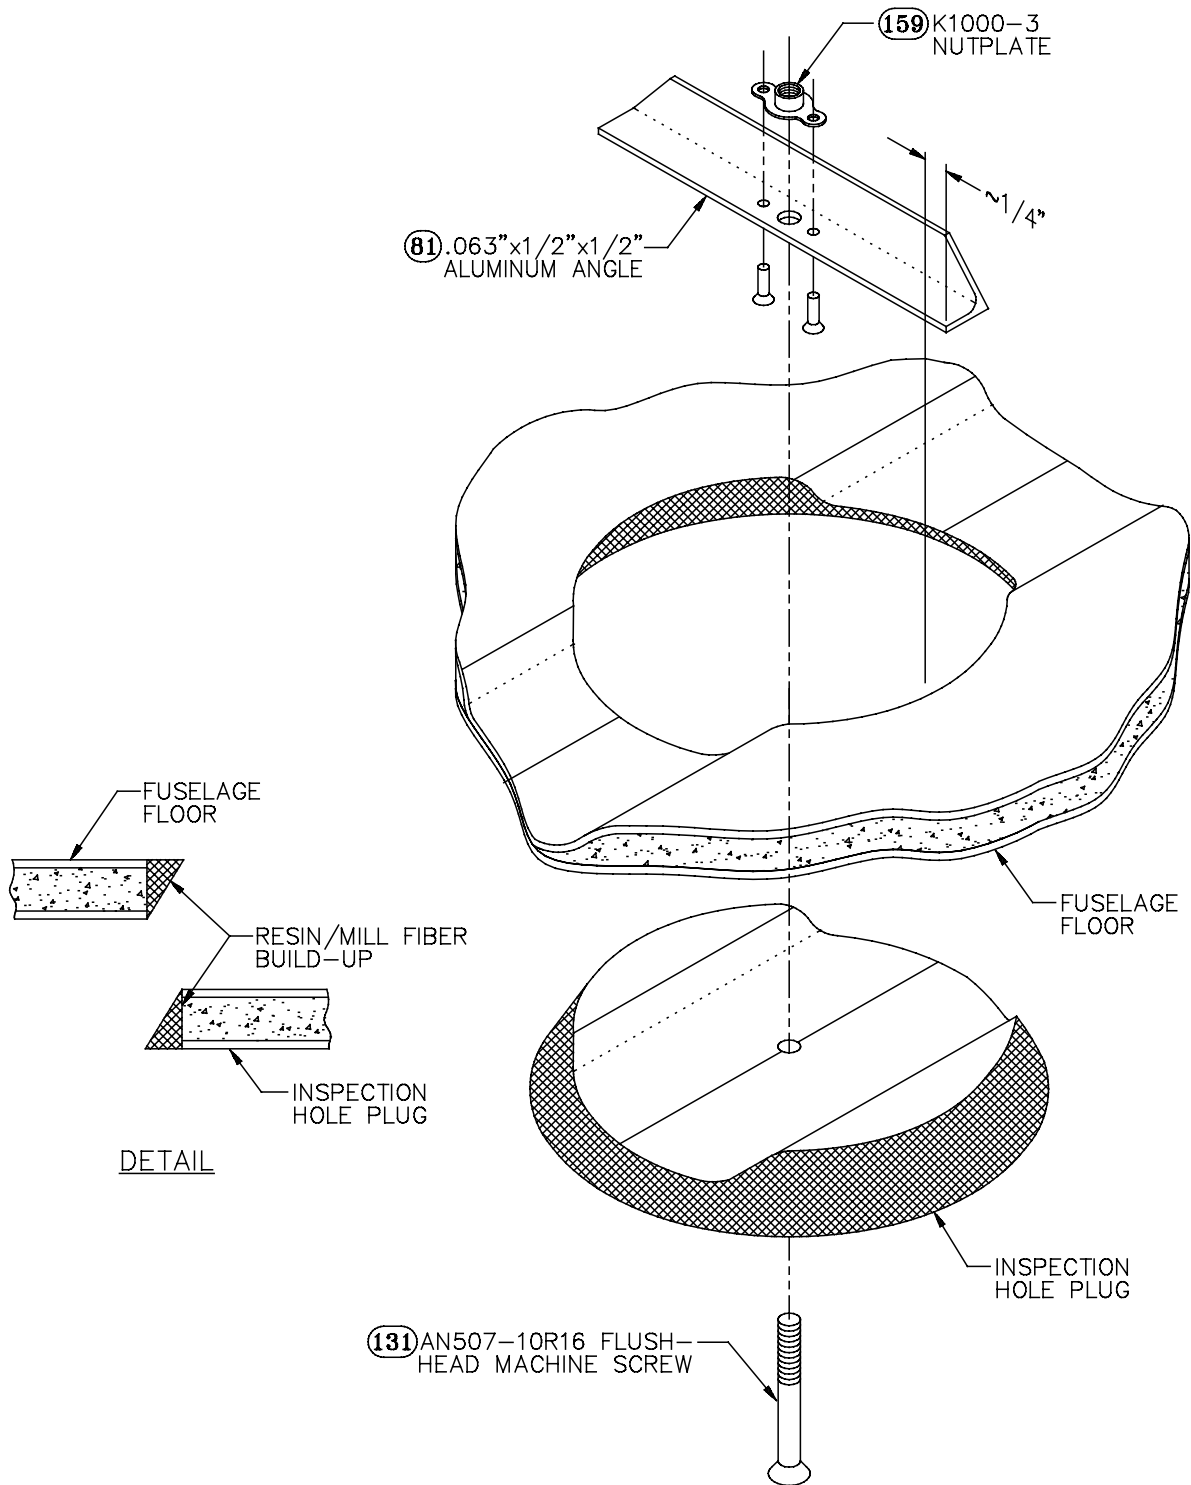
Fabricating the Lower Aft Fuselage Inspection Hole Cover
